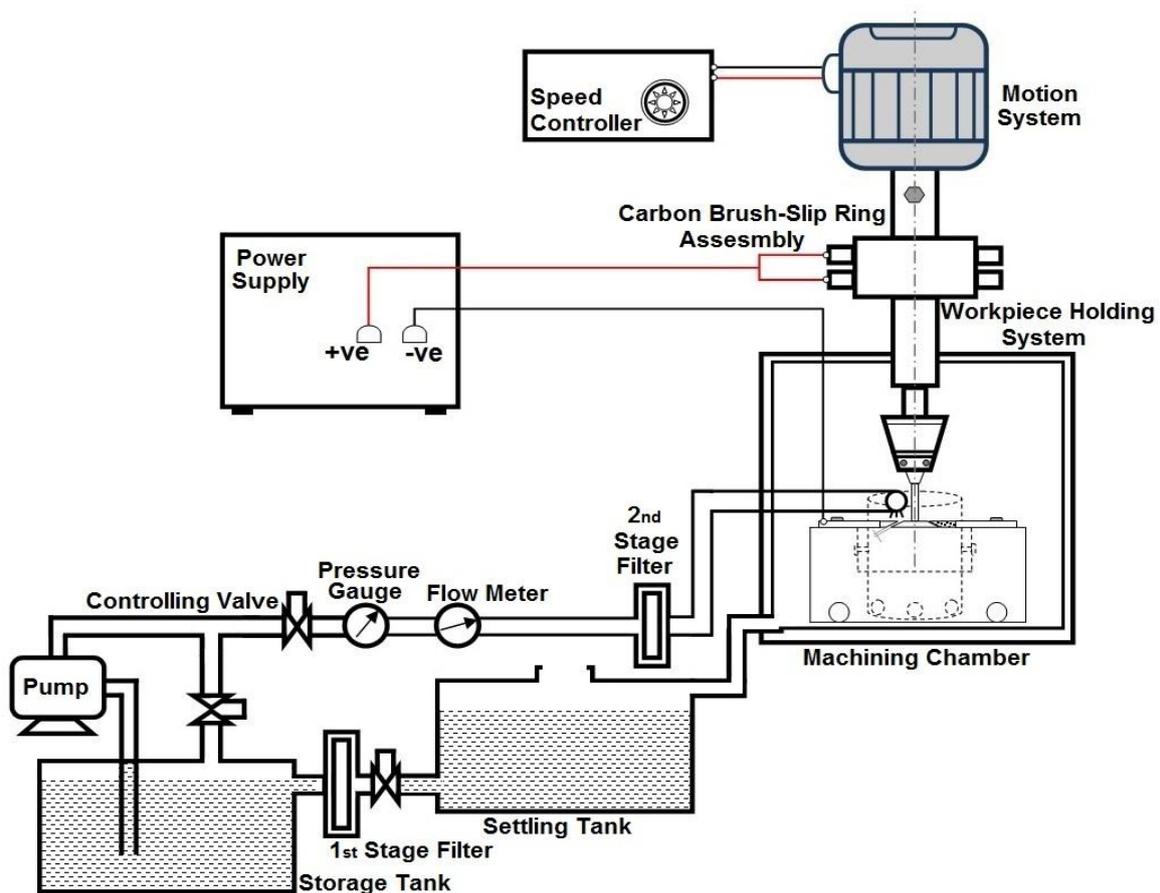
A schematic diagram of designed experimental setup for remanufacturing of engine valve face through ECH
